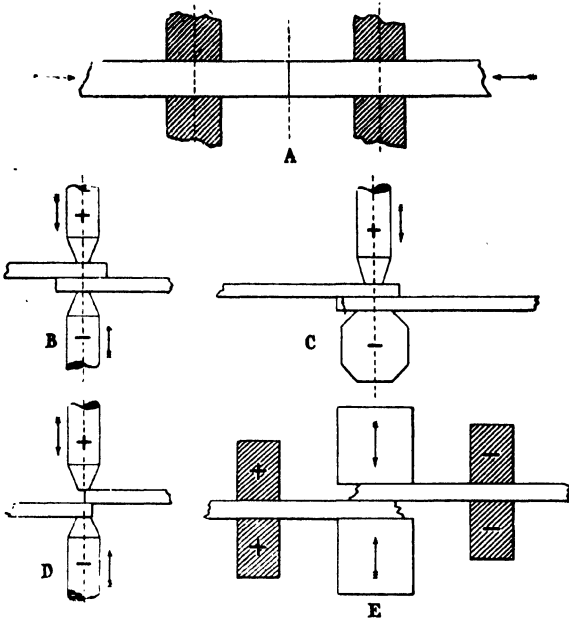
TYPES OF ELECTRODES FOR SPOT WELDING.
